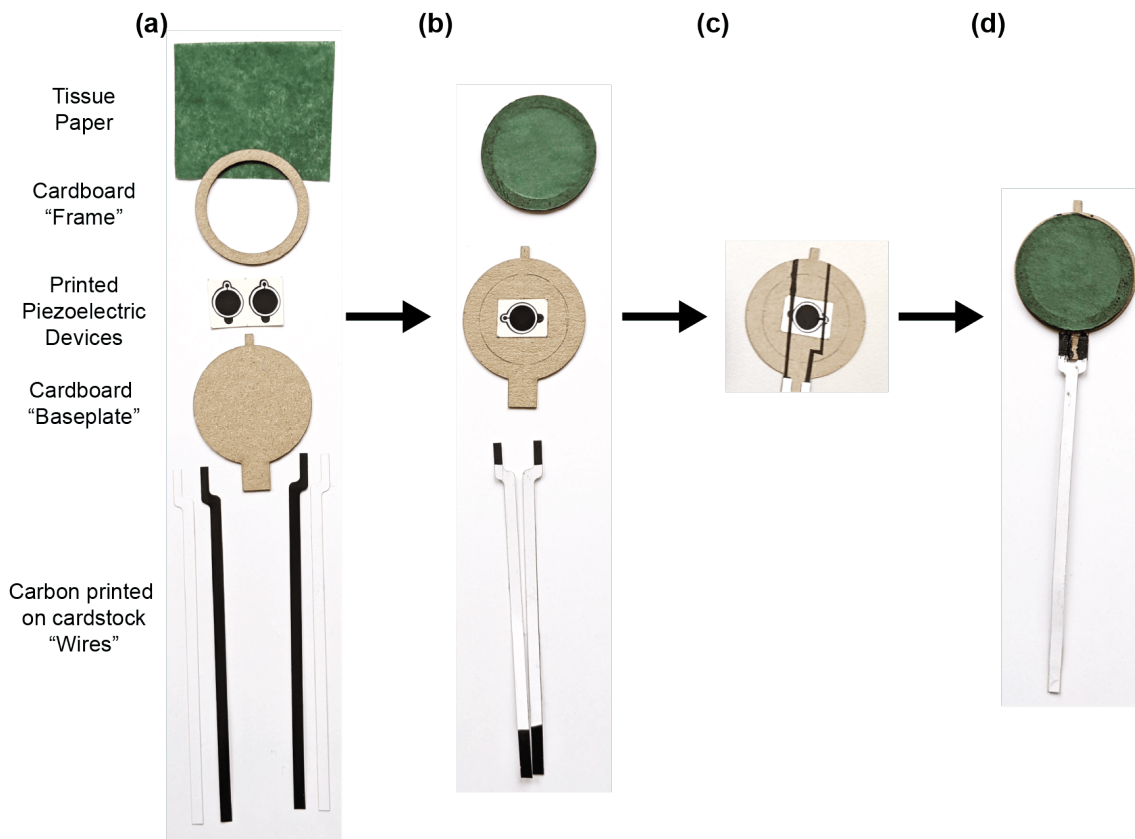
Assembly of degradable piezoelectric buzzers showing the four phases of fabrication. (a) Materials preparation. (b) Subcomponent assembly. (c) Printing of contact traces. (d) Final assembly.
